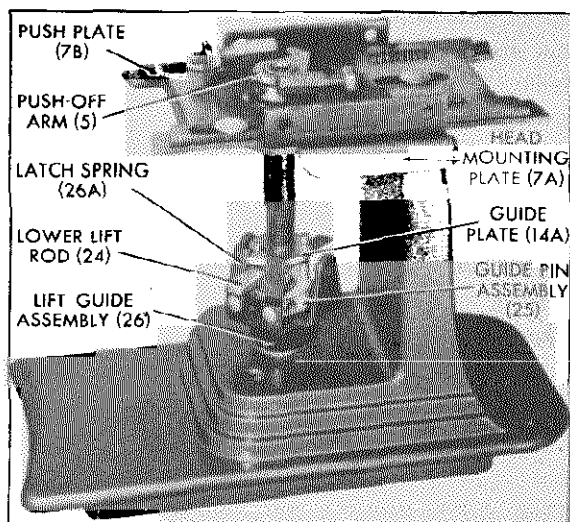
PUSH-OFF ARM, UPPER LIFT ROD, AND GUIDE PIN ASSEMBLY
